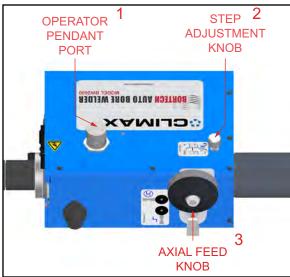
BW2600 CONTROLS SIDE VIEW
